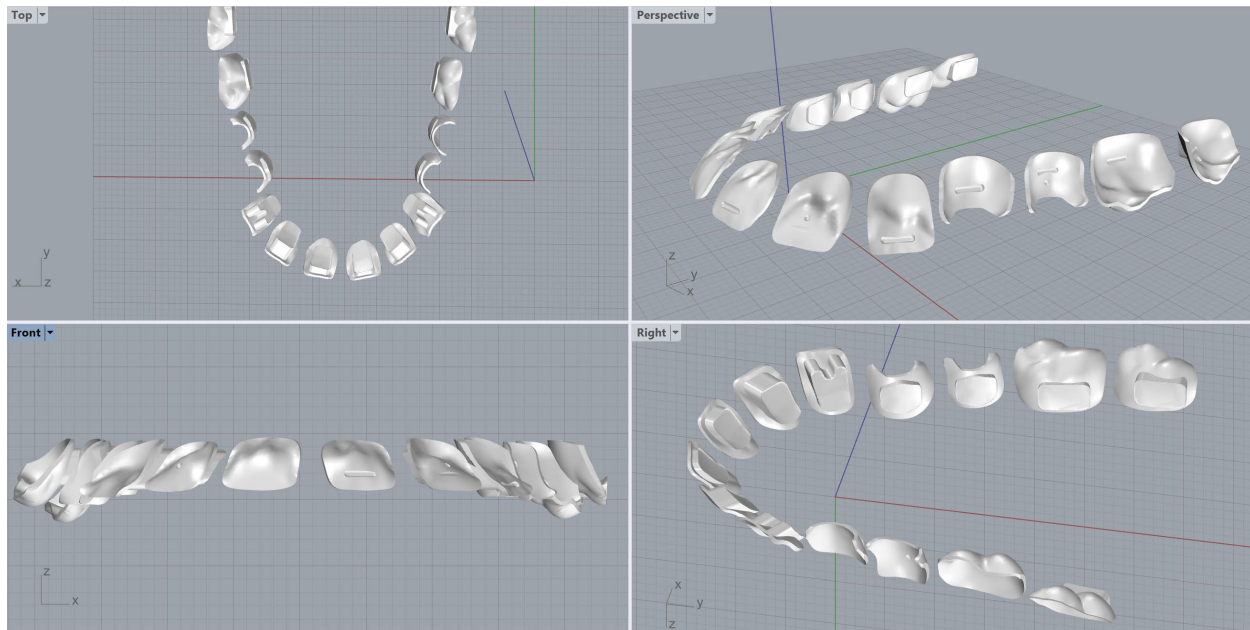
The complete set of custom bases and connectors are shown in this figure. Each of these custom bases have a connector with a unique shape that mimics the shape of the slot and wing component to facilitate accurate laser welding.
